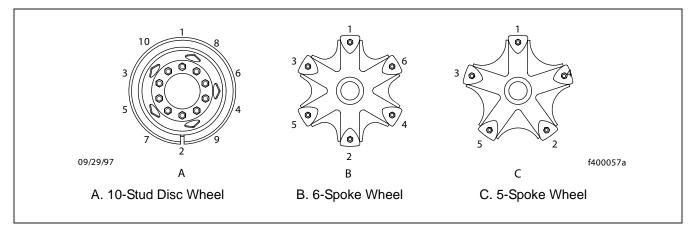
Wheel Nut and Rim Nut Tightening Sequence
